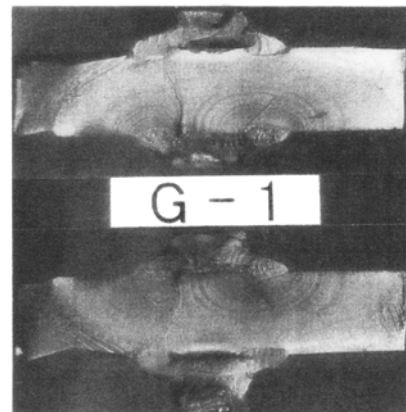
Fracture surface after fatigue test (Type G, 150 N/mm<sup>2</sup>, 9.37 × 10<sup>5</sup> cycles)
